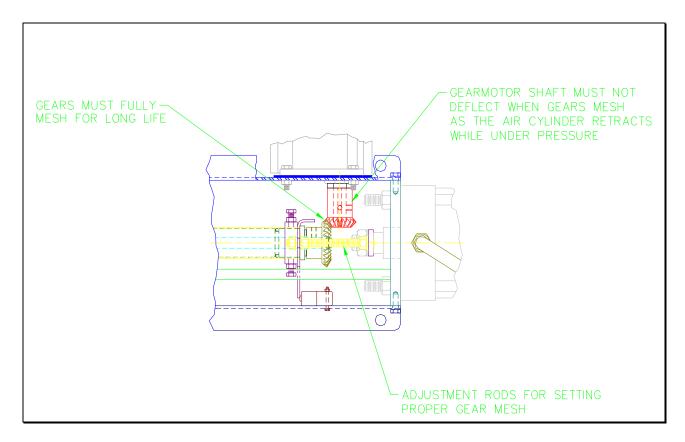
, BEVEL GEAR ALIGNMENT
